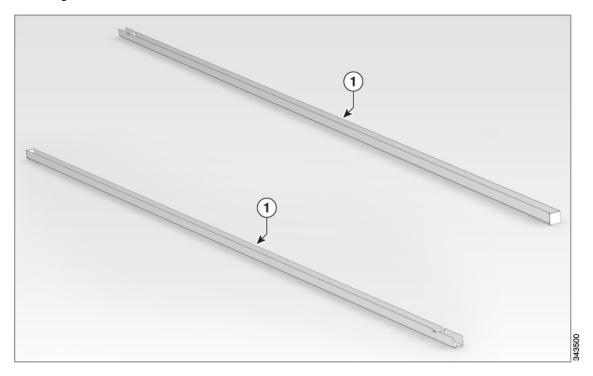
Attaching the Center U Attachment Pieces and the U Channels to the Center Floor Plate (2 of 3)—U Channel Attachment Piece and Part Description
